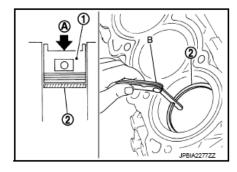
Checking Piston Ring End Gap Using Feeler Gauge Courtesy of NISSAN NORTH AMERICA, INC.
